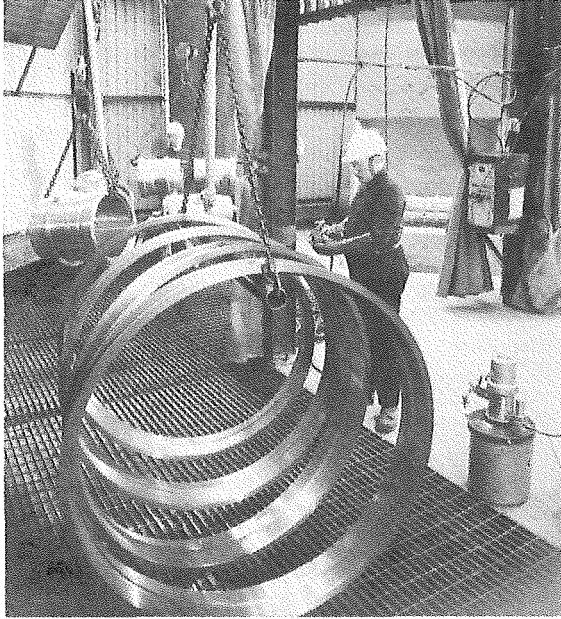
Machined castings undergoing fluorescent dye penetrant inspection
